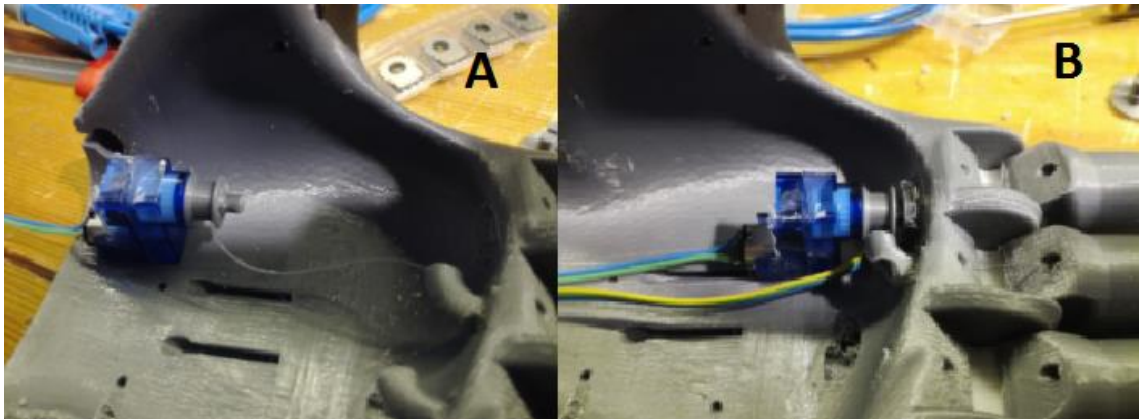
Finger actuator motor assemble A) Hand with finger actuator motor and guide pipes B) Finger actuator final fitting test
